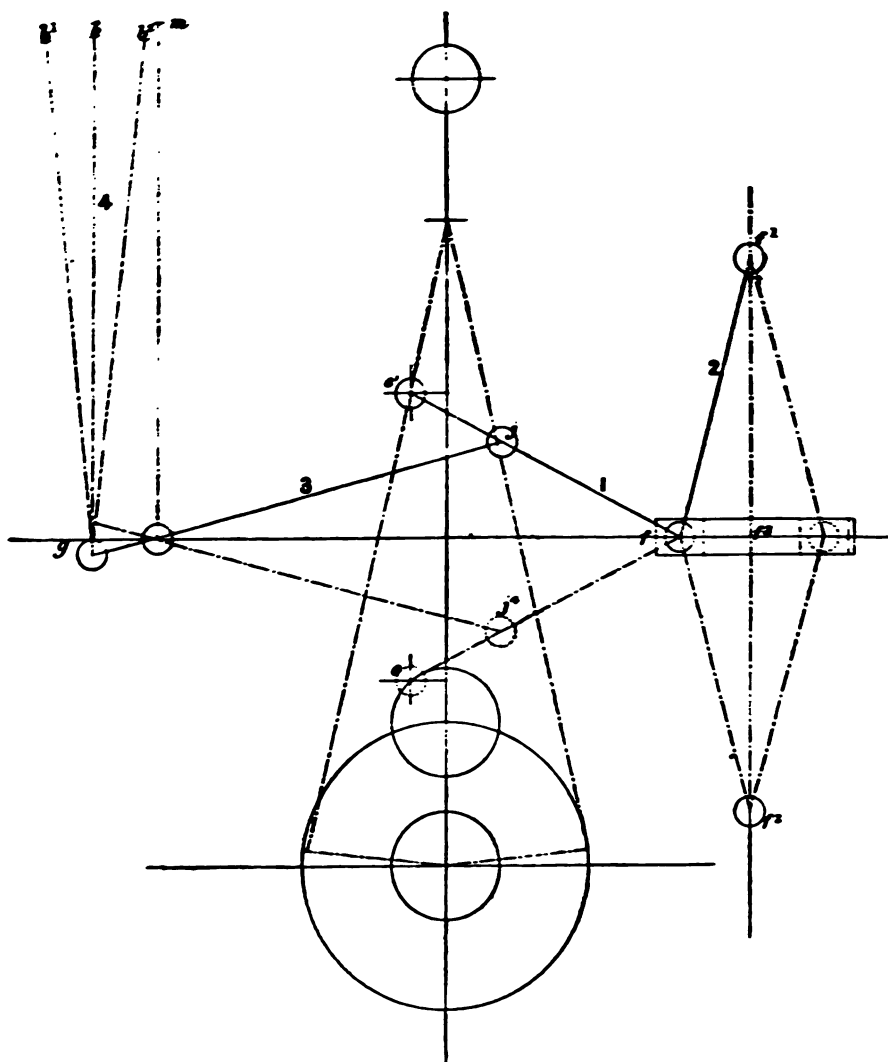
Joy Valve-gear, adapted for Vertical Engines.
